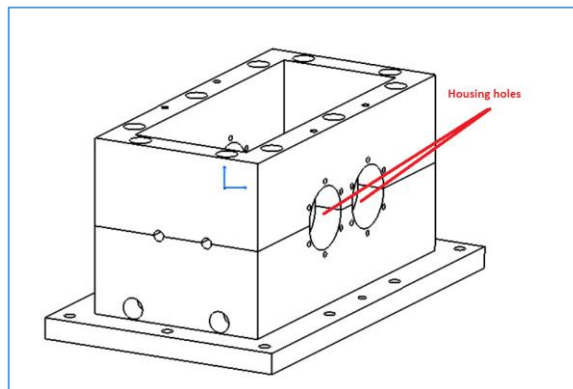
Operated Housing Holes with Horizontal Machining Center
